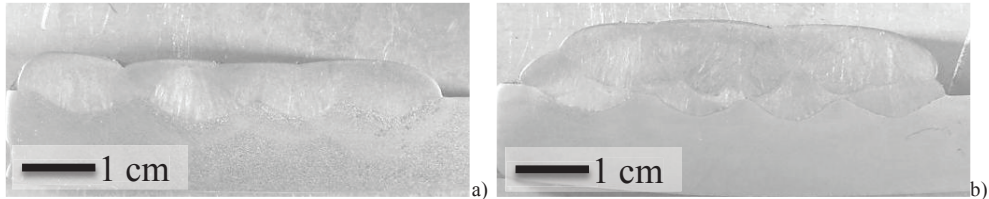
Macrographs of the welded specimens, a) A1, b) A2.
